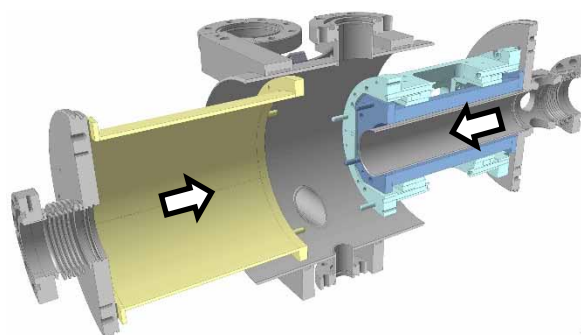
Assembly principle of the solenoids. In blue the inner coil and steerer magnet. In yellow the outer coil.
